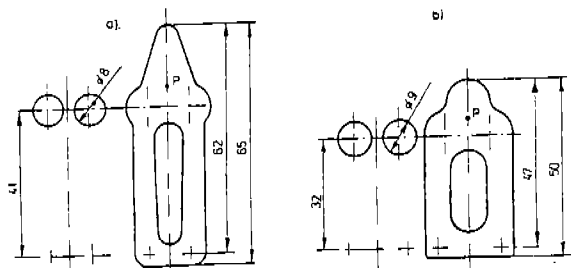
Shapes of suction valve tongue plates of a)SAF-23 compressor, b) SAF-5 compressor
